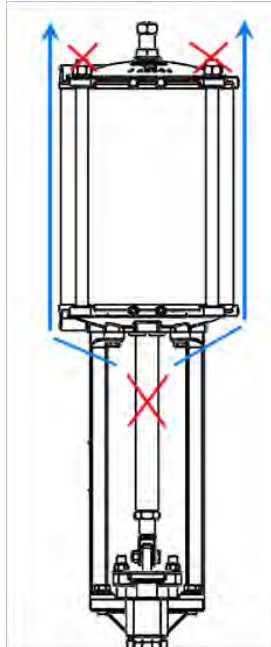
Knife Gate Valve with Pneumatic Cylinder Actuator, Vertical Lifting
